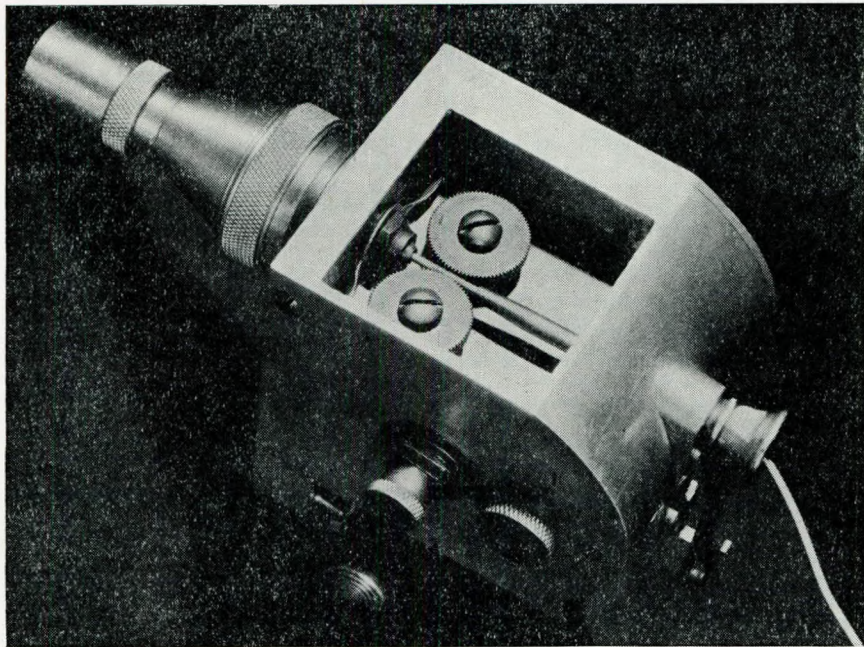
The pistol with lid removed, showing the wire rollers.
